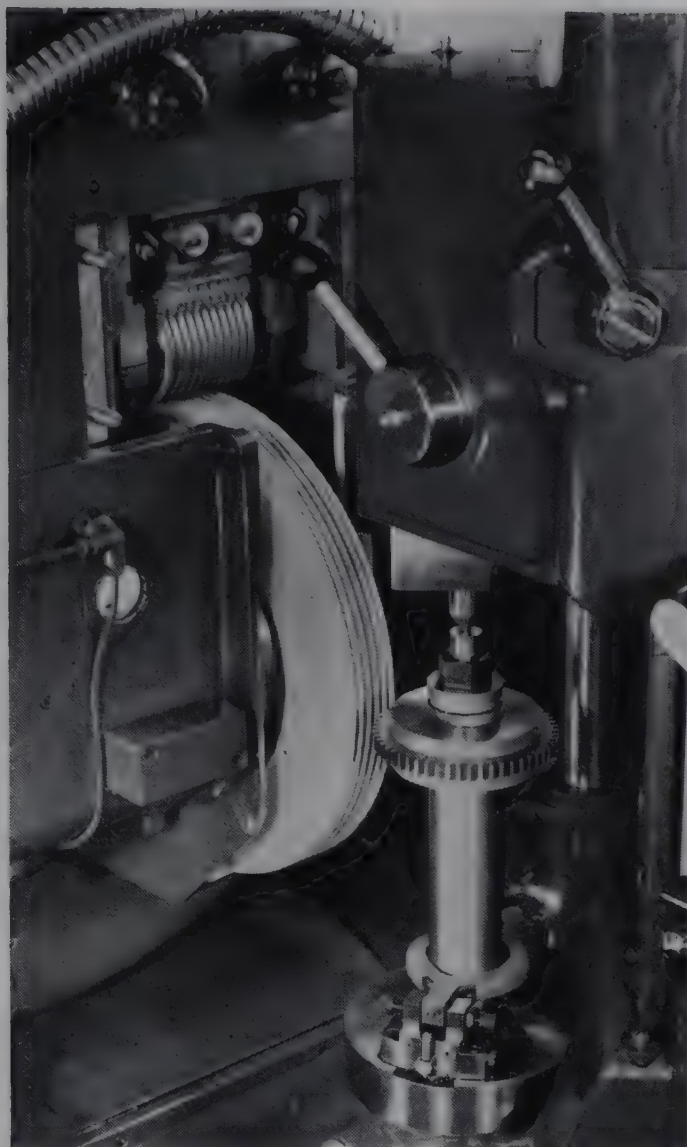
Crush-form grinding (safety guard removed for clarity). Courtesy The Sheffield Corporation. The free-spinning crusher roll, above, produces in the wheel a shape which is then reproduced in the workpiece (foreground).
